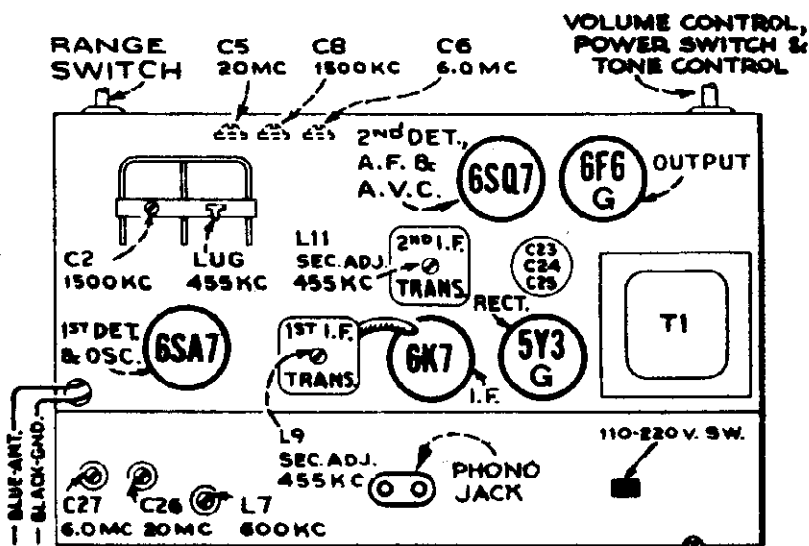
TUBE, TRIMMER AND PARTS LOCATION
